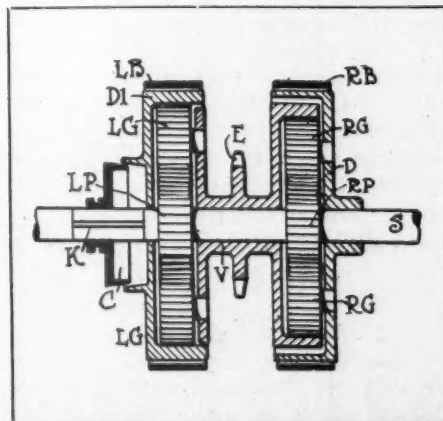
PLANETARY GEARSET, SECTIONAL VIEW
